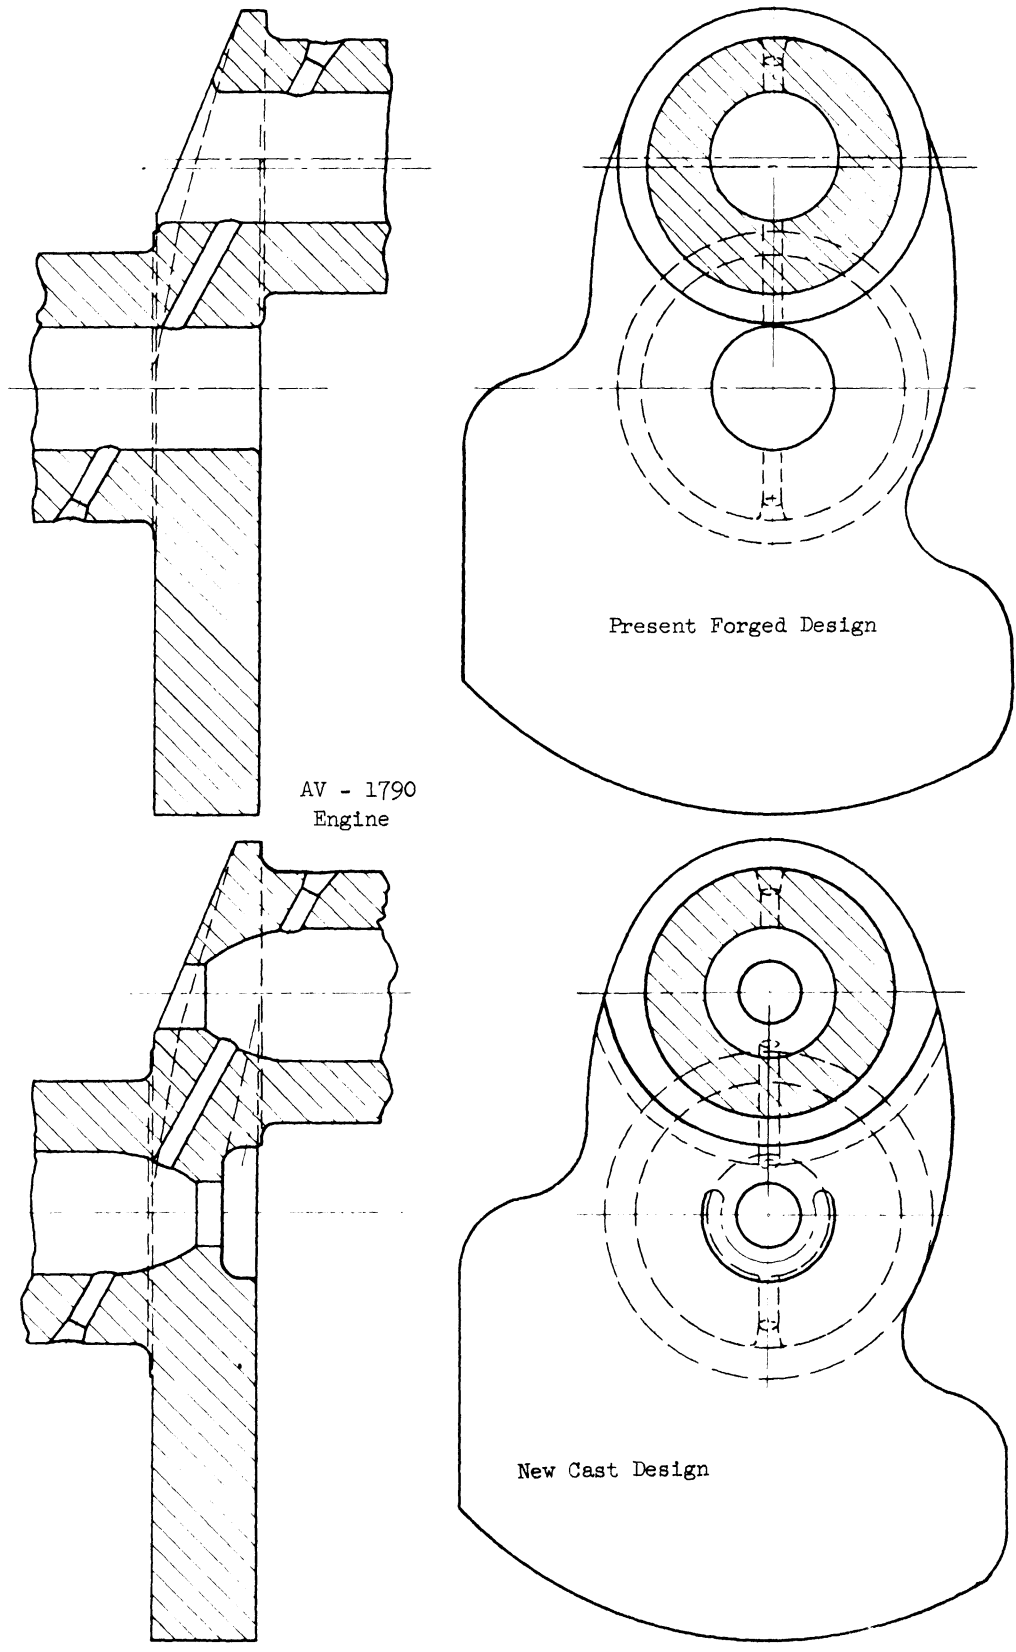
Cast and Forged Crankshaft, AV-1790 Engine.
